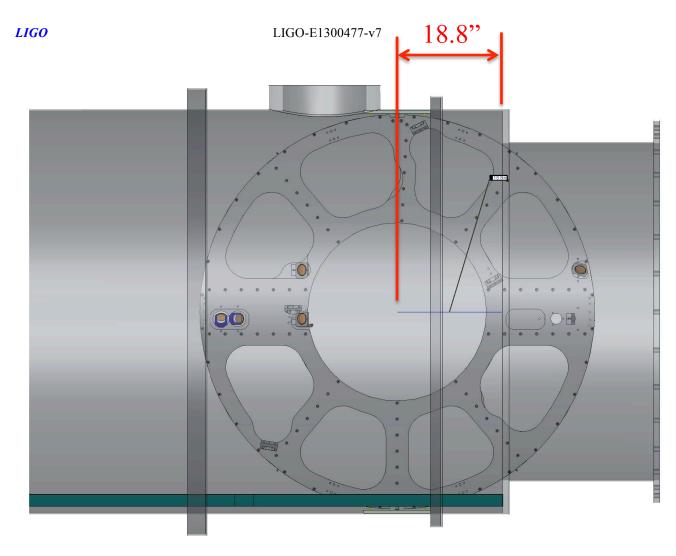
Periscope Assembly shown in the staging position inside the A7 Adapter
